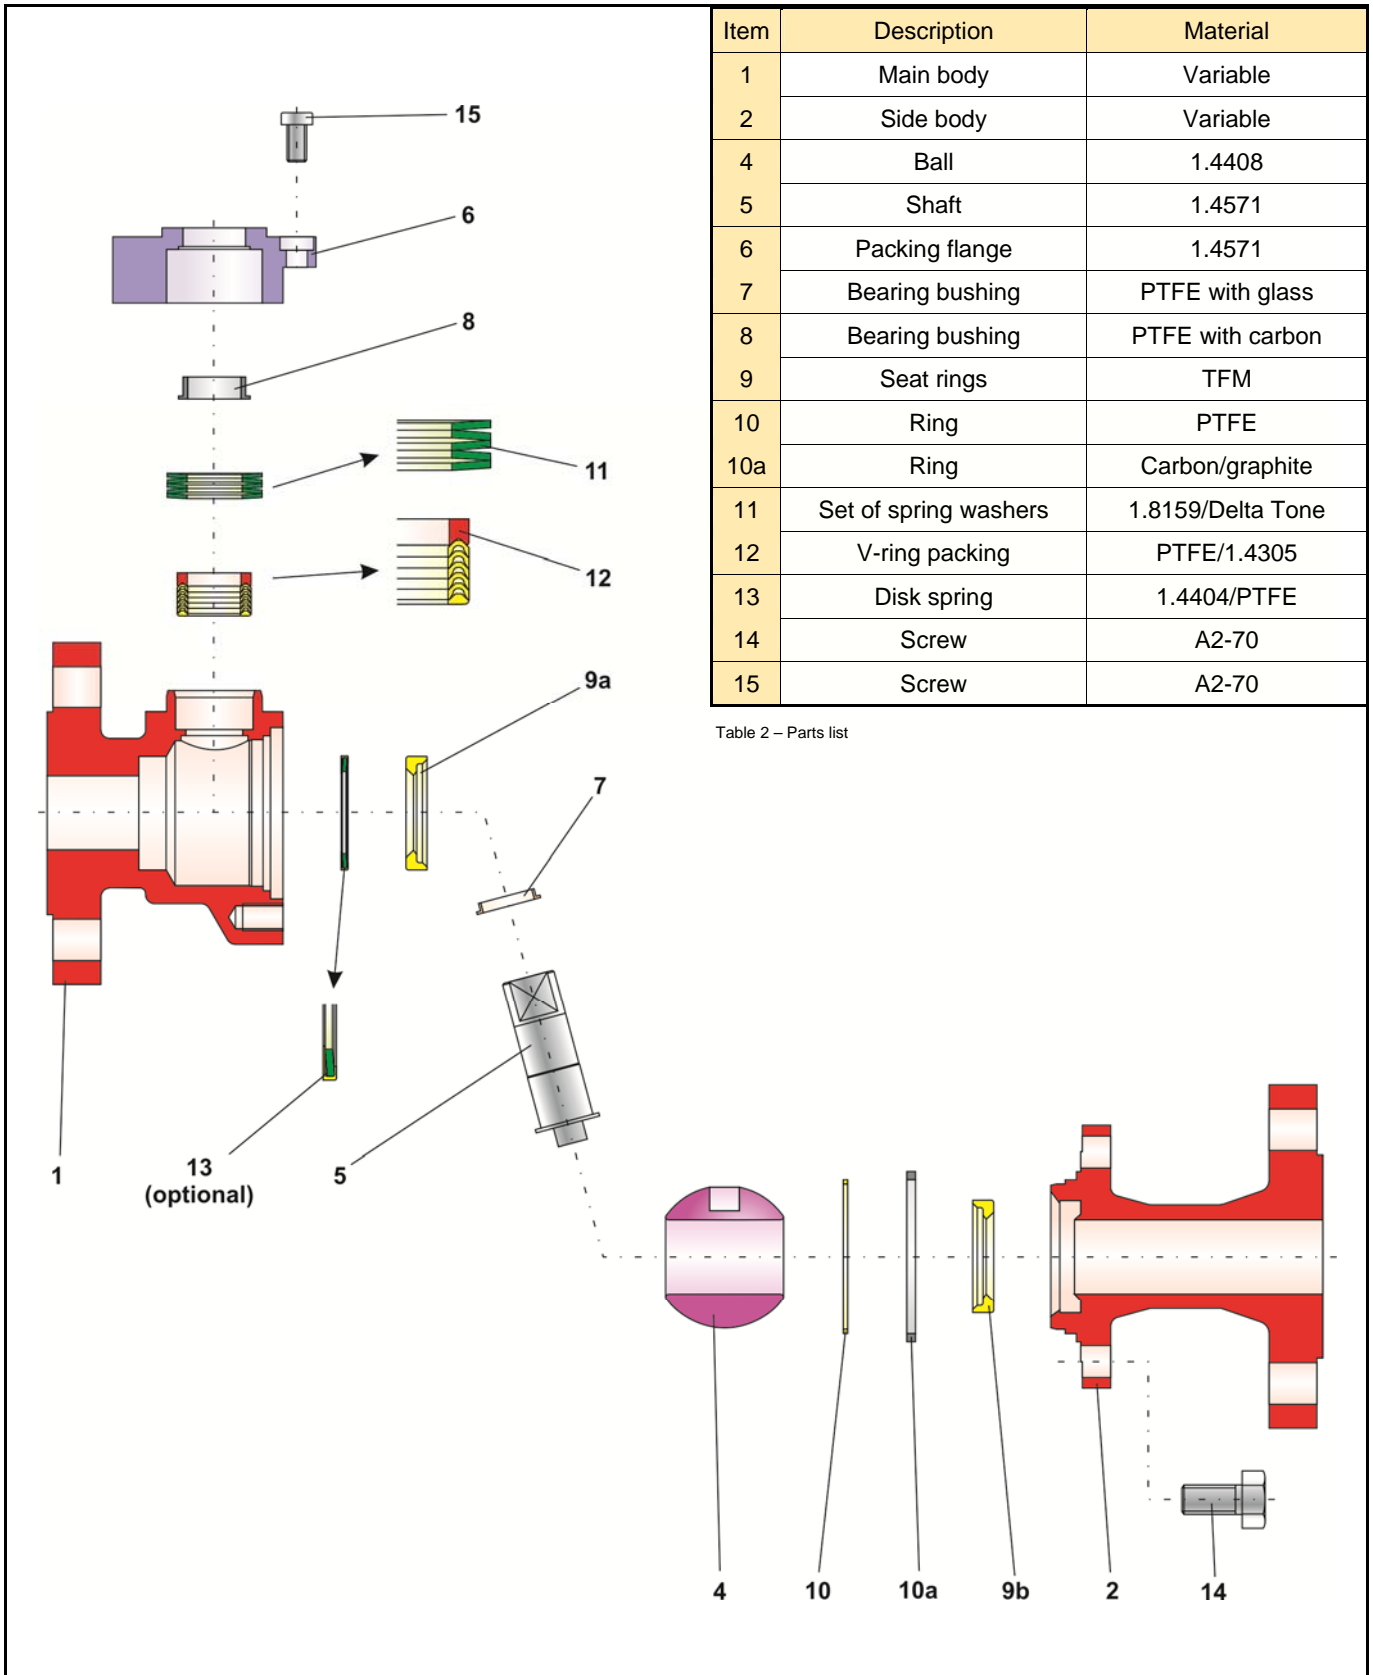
Detail drawing of standard version of Series 26a Ball Valve
